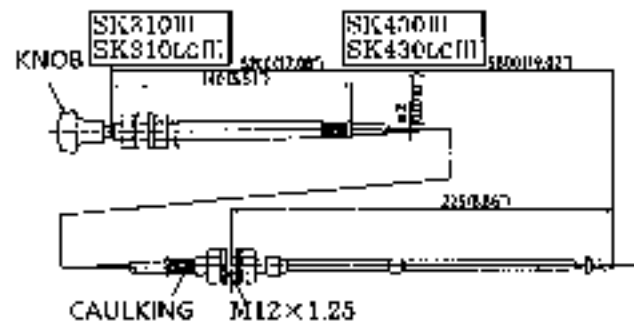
Detail of emergency E/G stop knob control cable (3)
